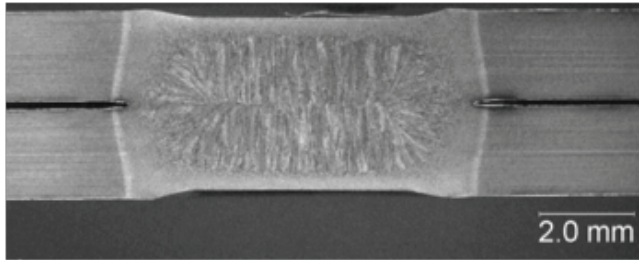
Cross-section view of a weld with acceptable weld nugget size and no defect.
